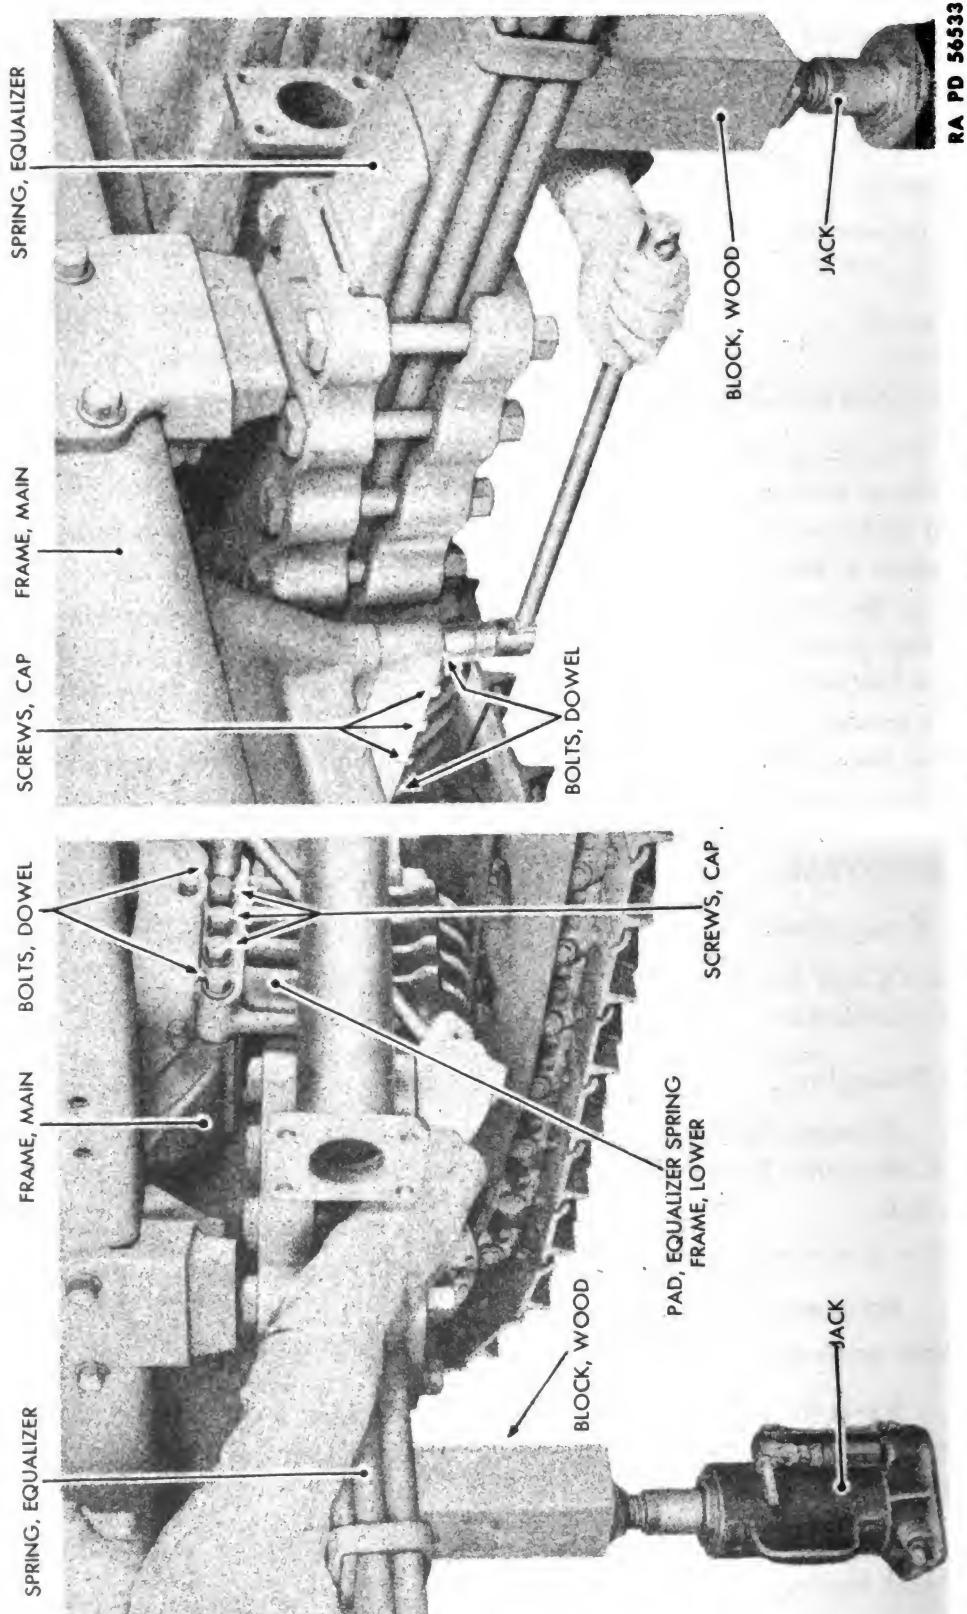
Lower Equalizer Spring Frame Pad Removal
